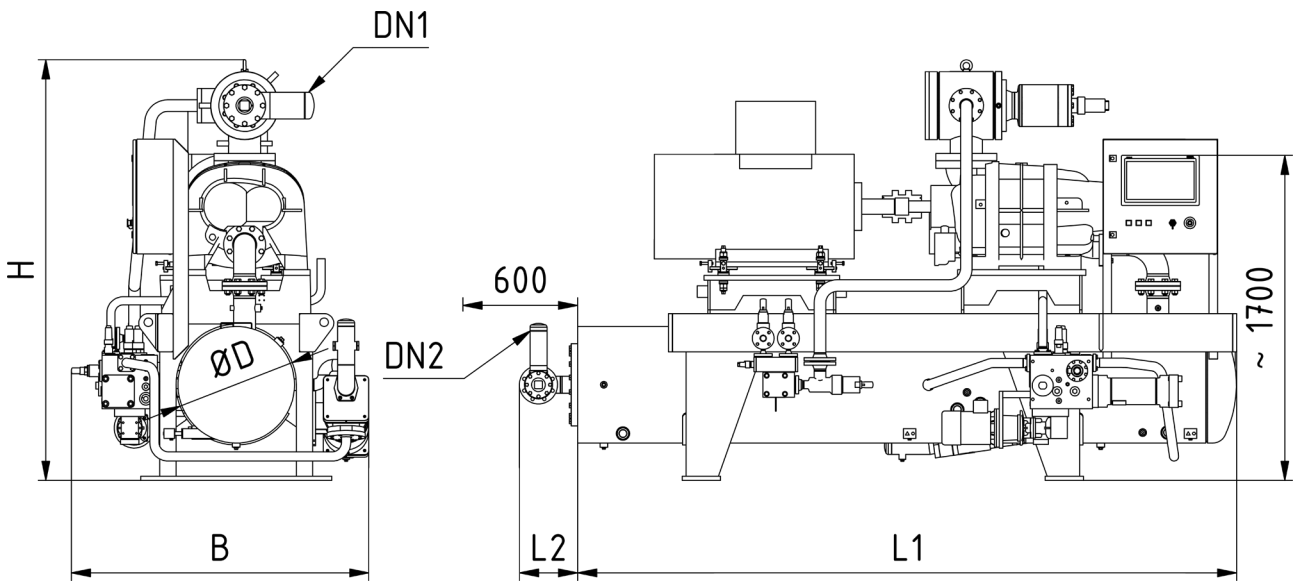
GEA Grasso SP1 compressor frame size P, R, S, T, V, W, Y
